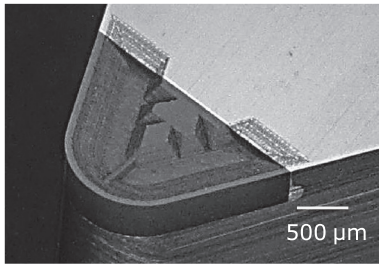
NCB100 insert with a three-dimensionally shaped chip breaker
